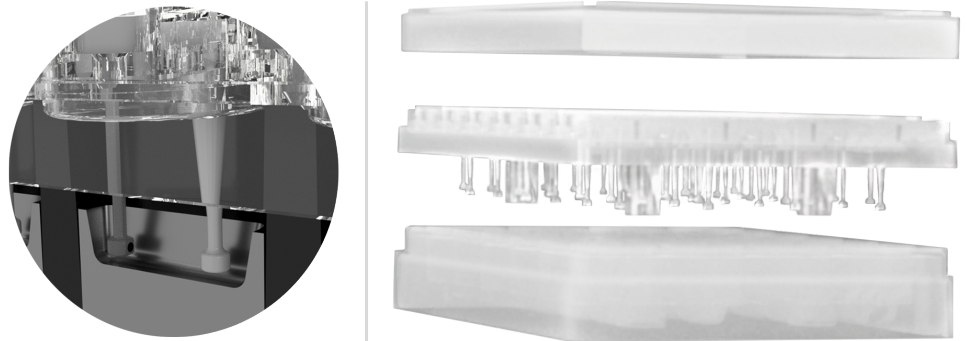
LEFT: Enlarged visualization of the two post system in the casting well. RIGHT: Pieces of the casting plate; (top) plate lid, (middle) holder lattice and posts, (bottom) casting plate.
